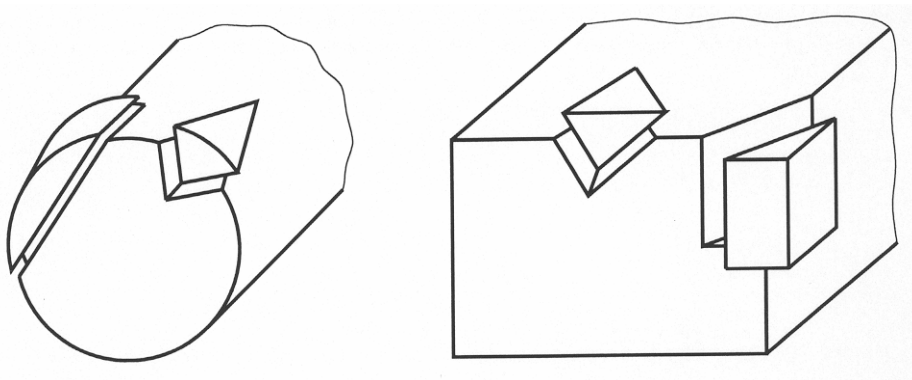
Forging stock (diameter or thickness < 100 mm), bar for machining, bar for fasteners, sections and wire
